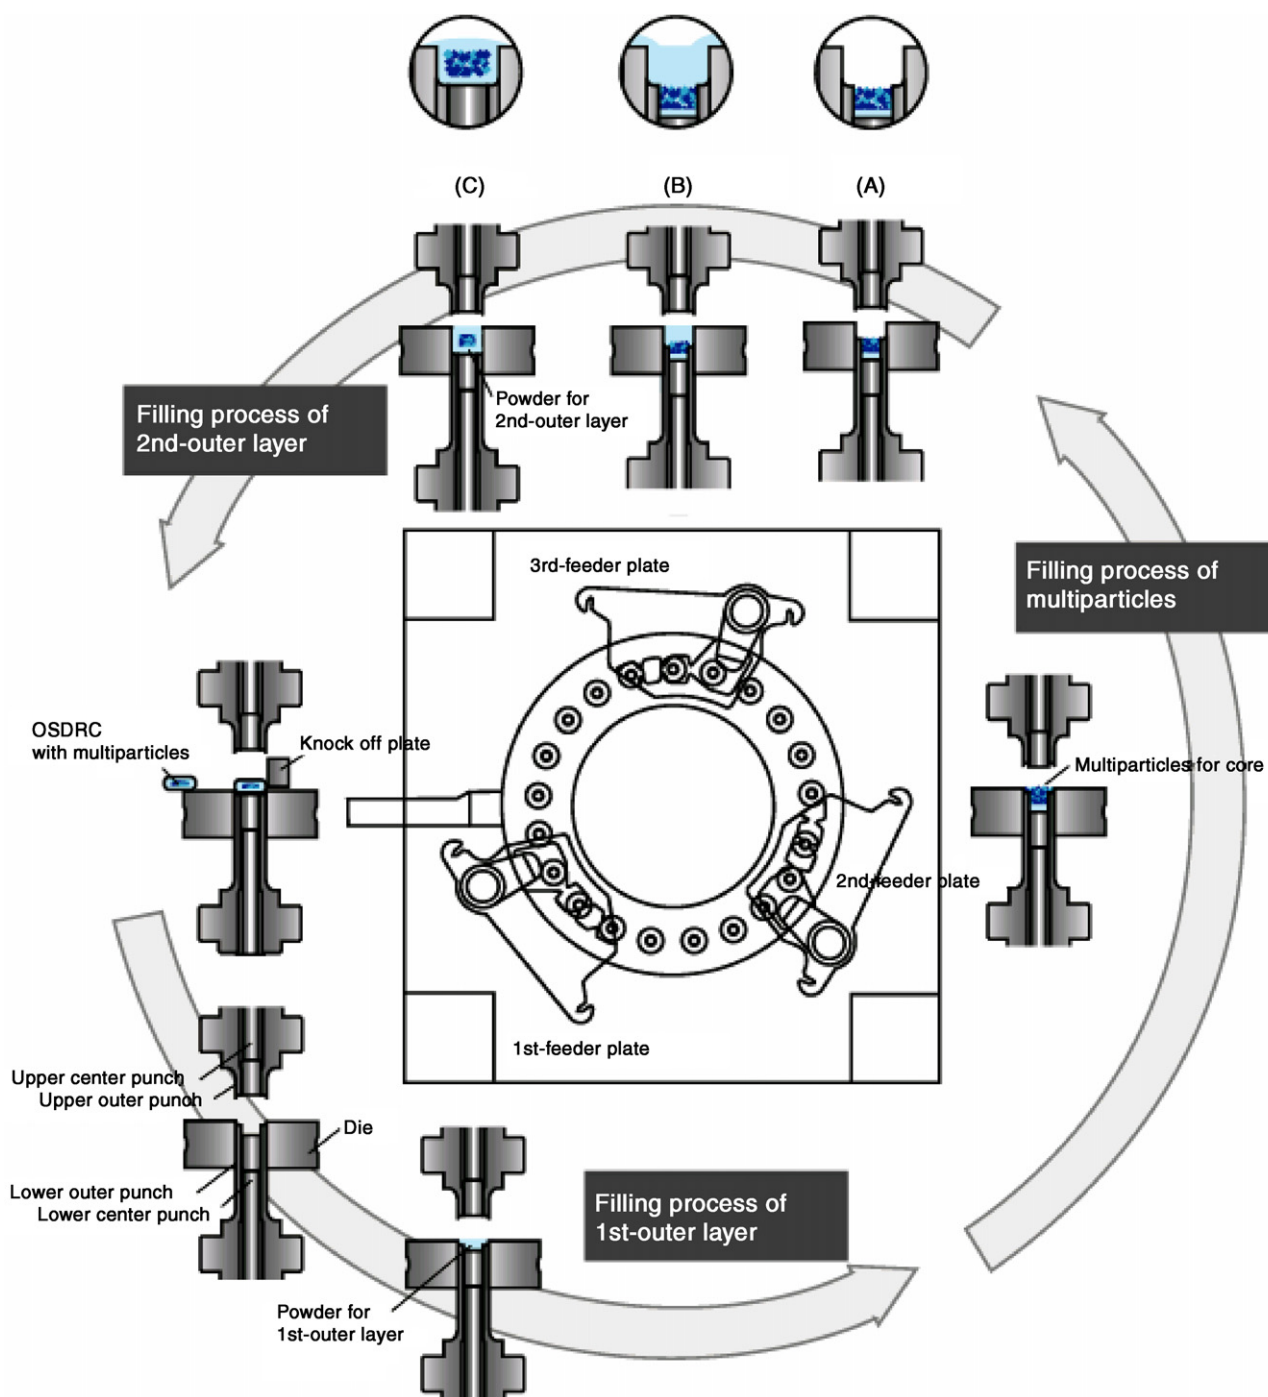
Overhead view of the rotary tableting machine for OSDRC.
